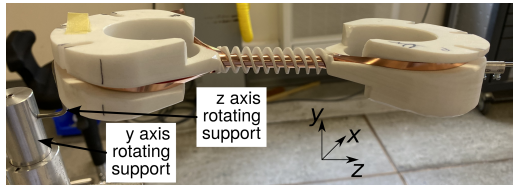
Helical winding setup with rotating axes, as an example for the chosen coil-end design. The winding body is mounted with a rod through the beam pipe.
